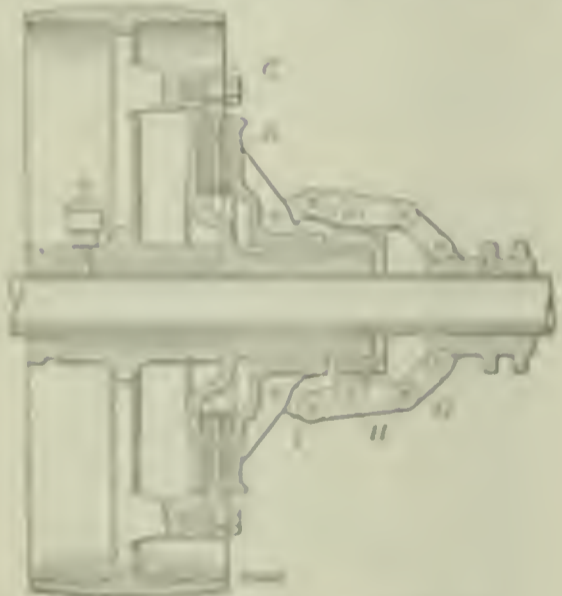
SECTIONAL VIEW OF THE PLAMONDON CLUTCH
